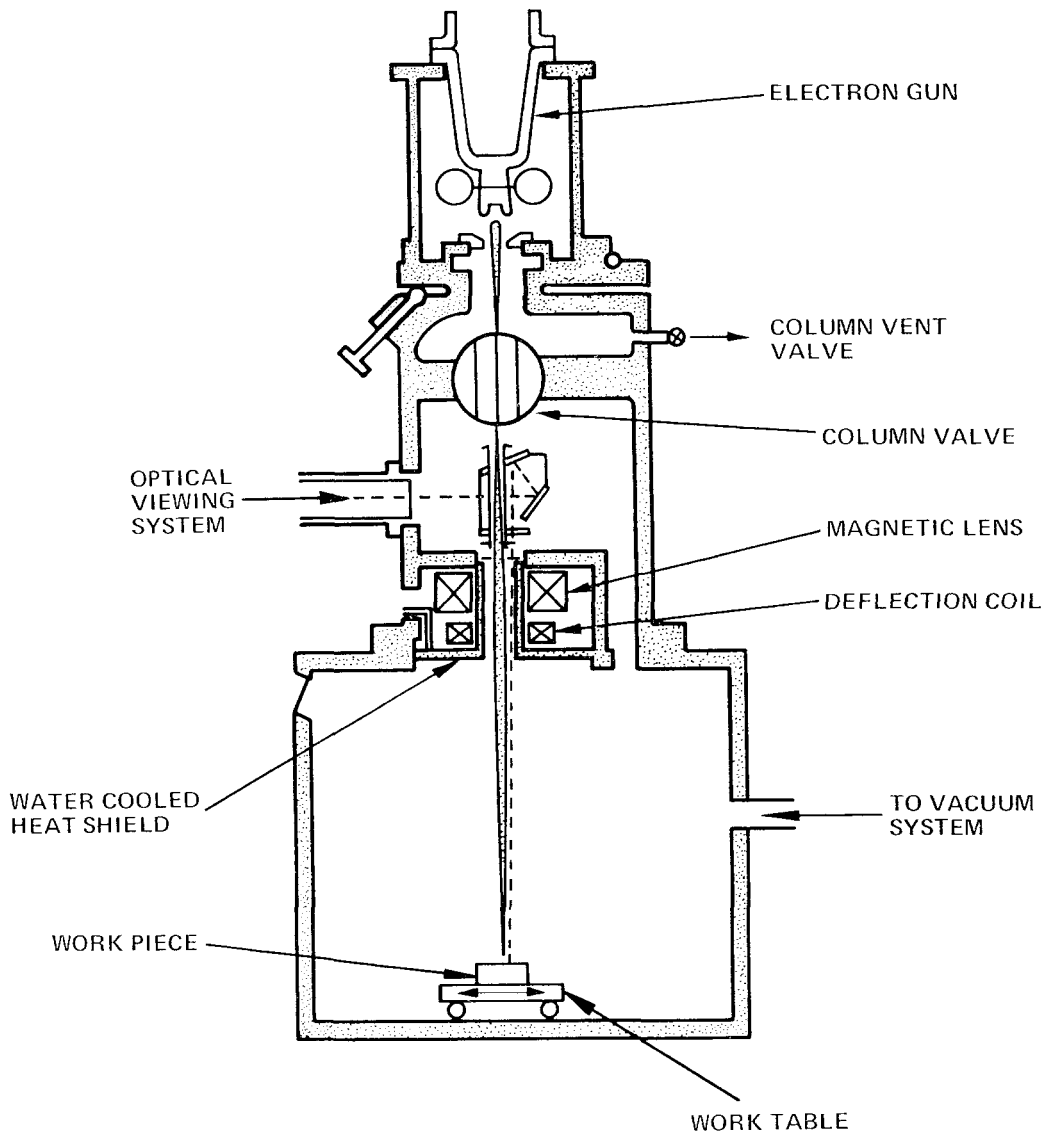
AN ELECTRON BEAM GUN FOCUSING ON A WORKPIECE INSIDE THE VACUUM CHAMBER
